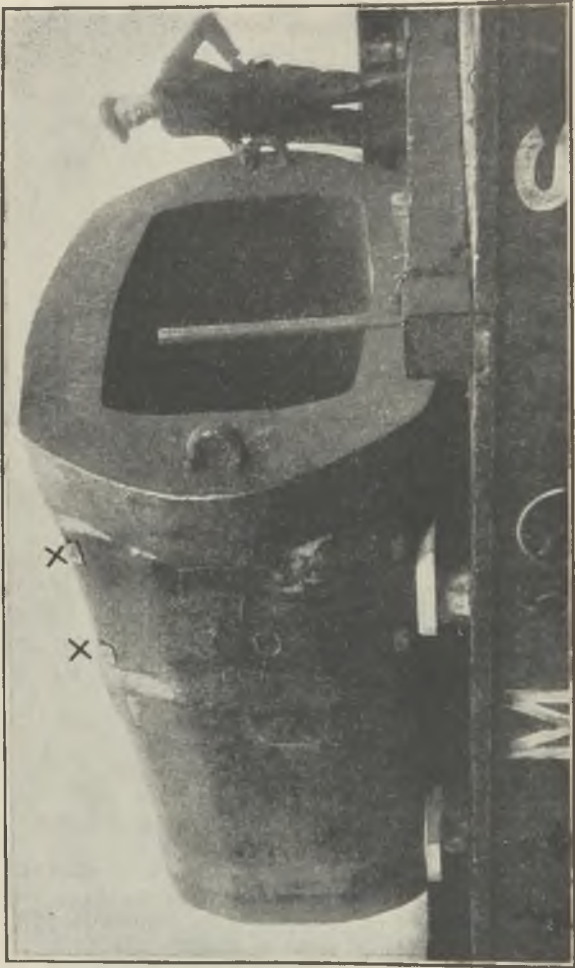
A 34-TON INGOT-MOULD CASTING.
